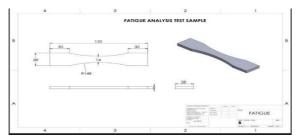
Fatigue Test Specimen ASTM (E466-15)
